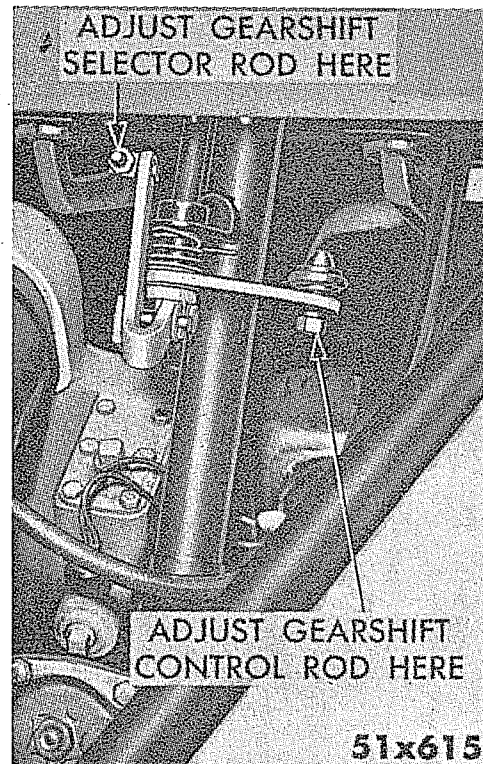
Adjusting Gearshift Selector Rod and Gearshift Control Rod (1-08A, 2-26A, 2-33A).
